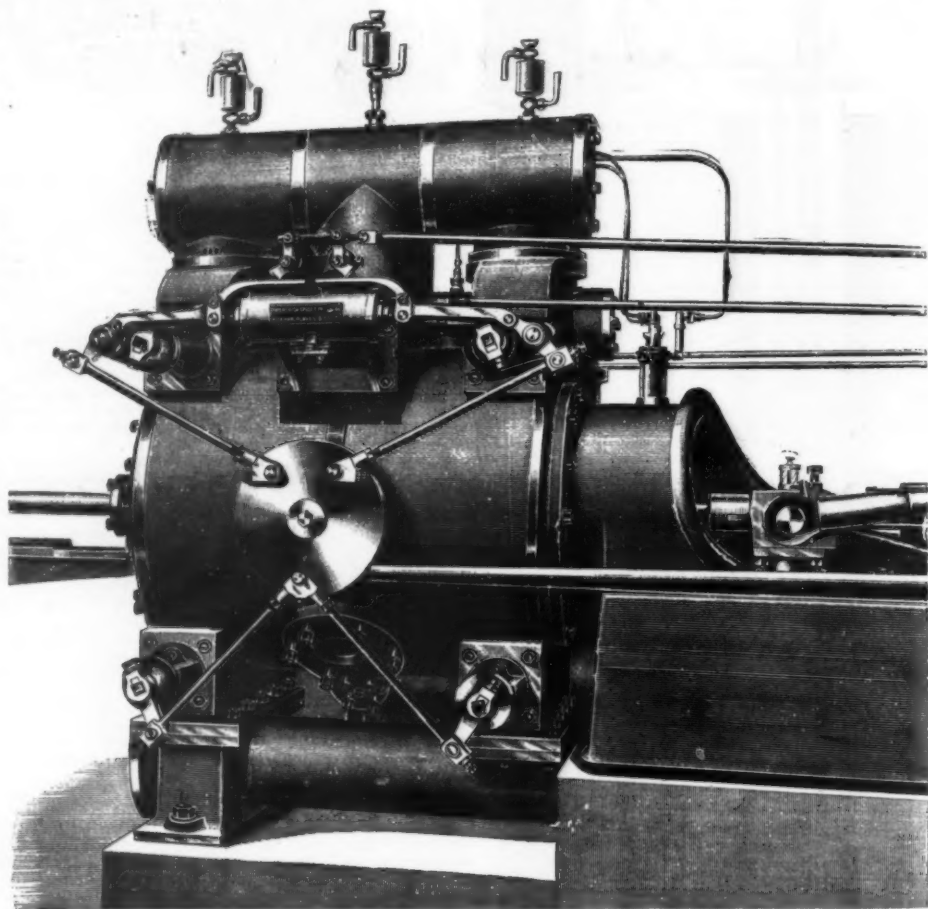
IMPROVED CORLISS VALVE GEAR.
